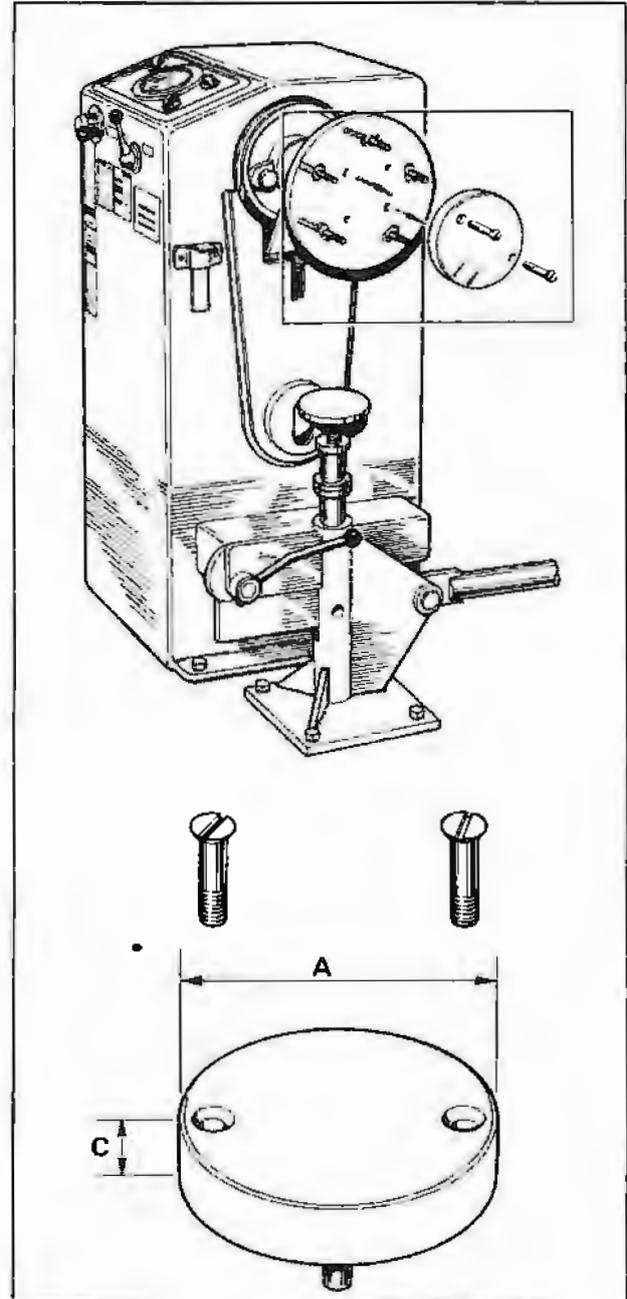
Vertical type of balancing machine with adapter for spigotted wheels
